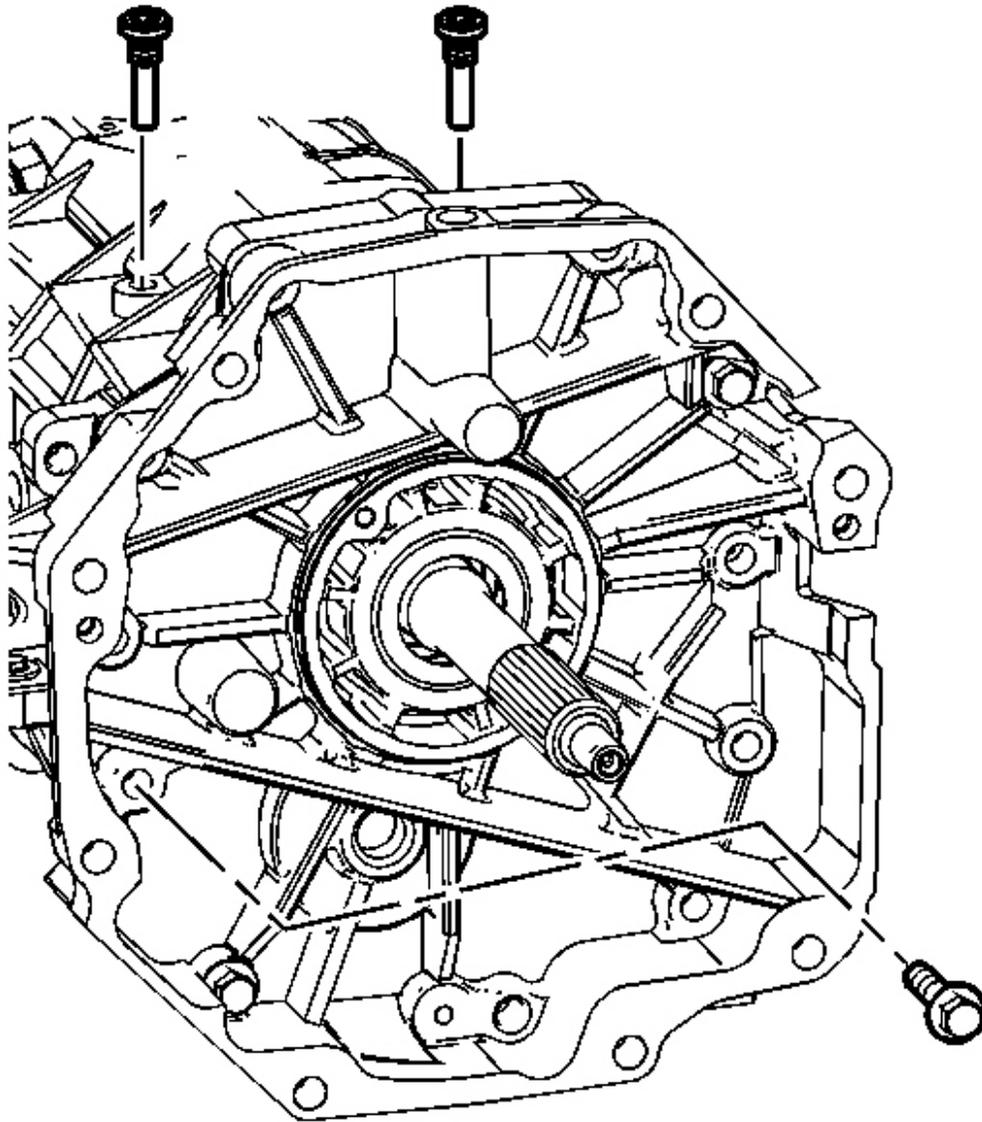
View Of Adapter Plate To Transmission Case Bolts & Shift Lever Guide Bolts
